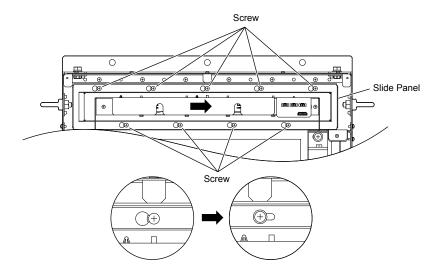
Remove the Fan Unit: 4A0515 and 4A0675
